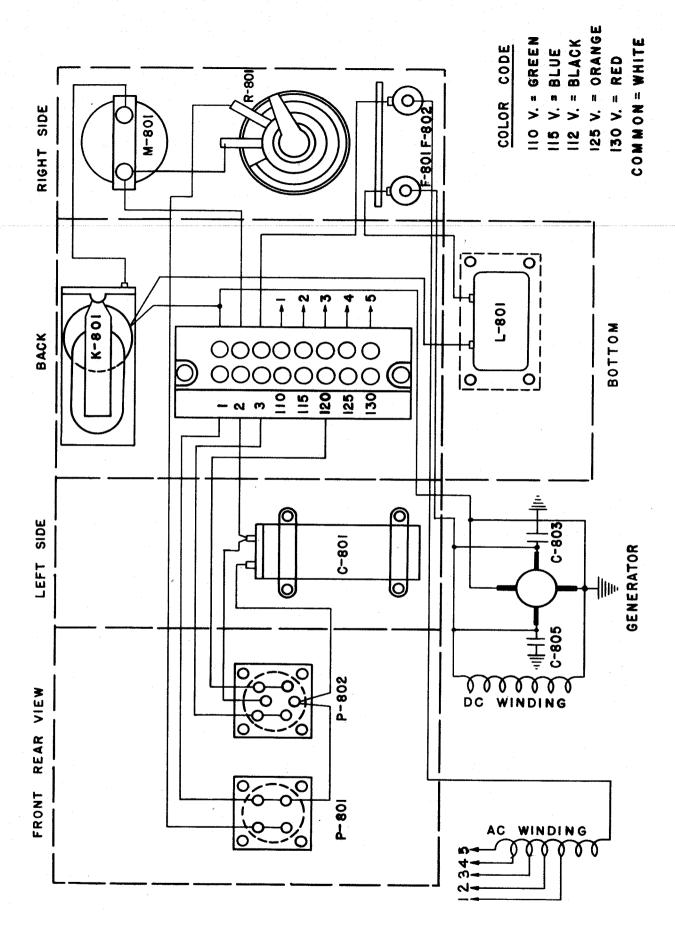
Wiring Diagram for Generator Type CDO-21650, 120 Volts, 800 Cycles, Single Phase A. C. Output, a Part of Motor Generator Set Type CDO-21648 and Type CDO-21652 (Drawing M-7408411) 151
